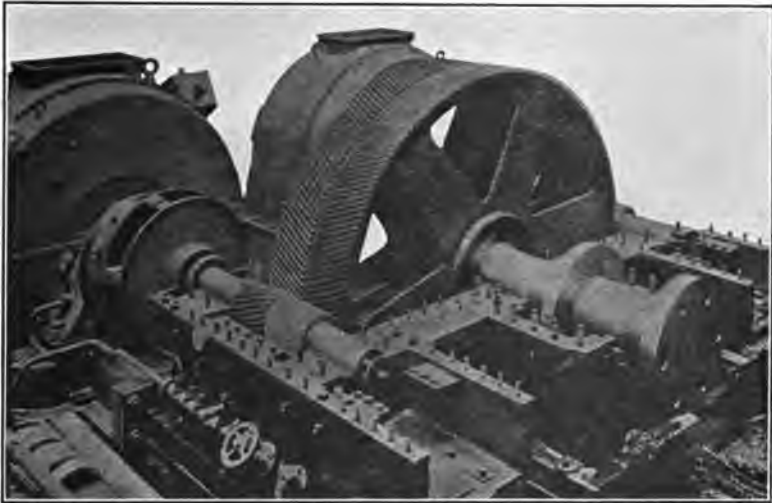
Wulsty Castle*: Reduction Gearing with Cover Removed
